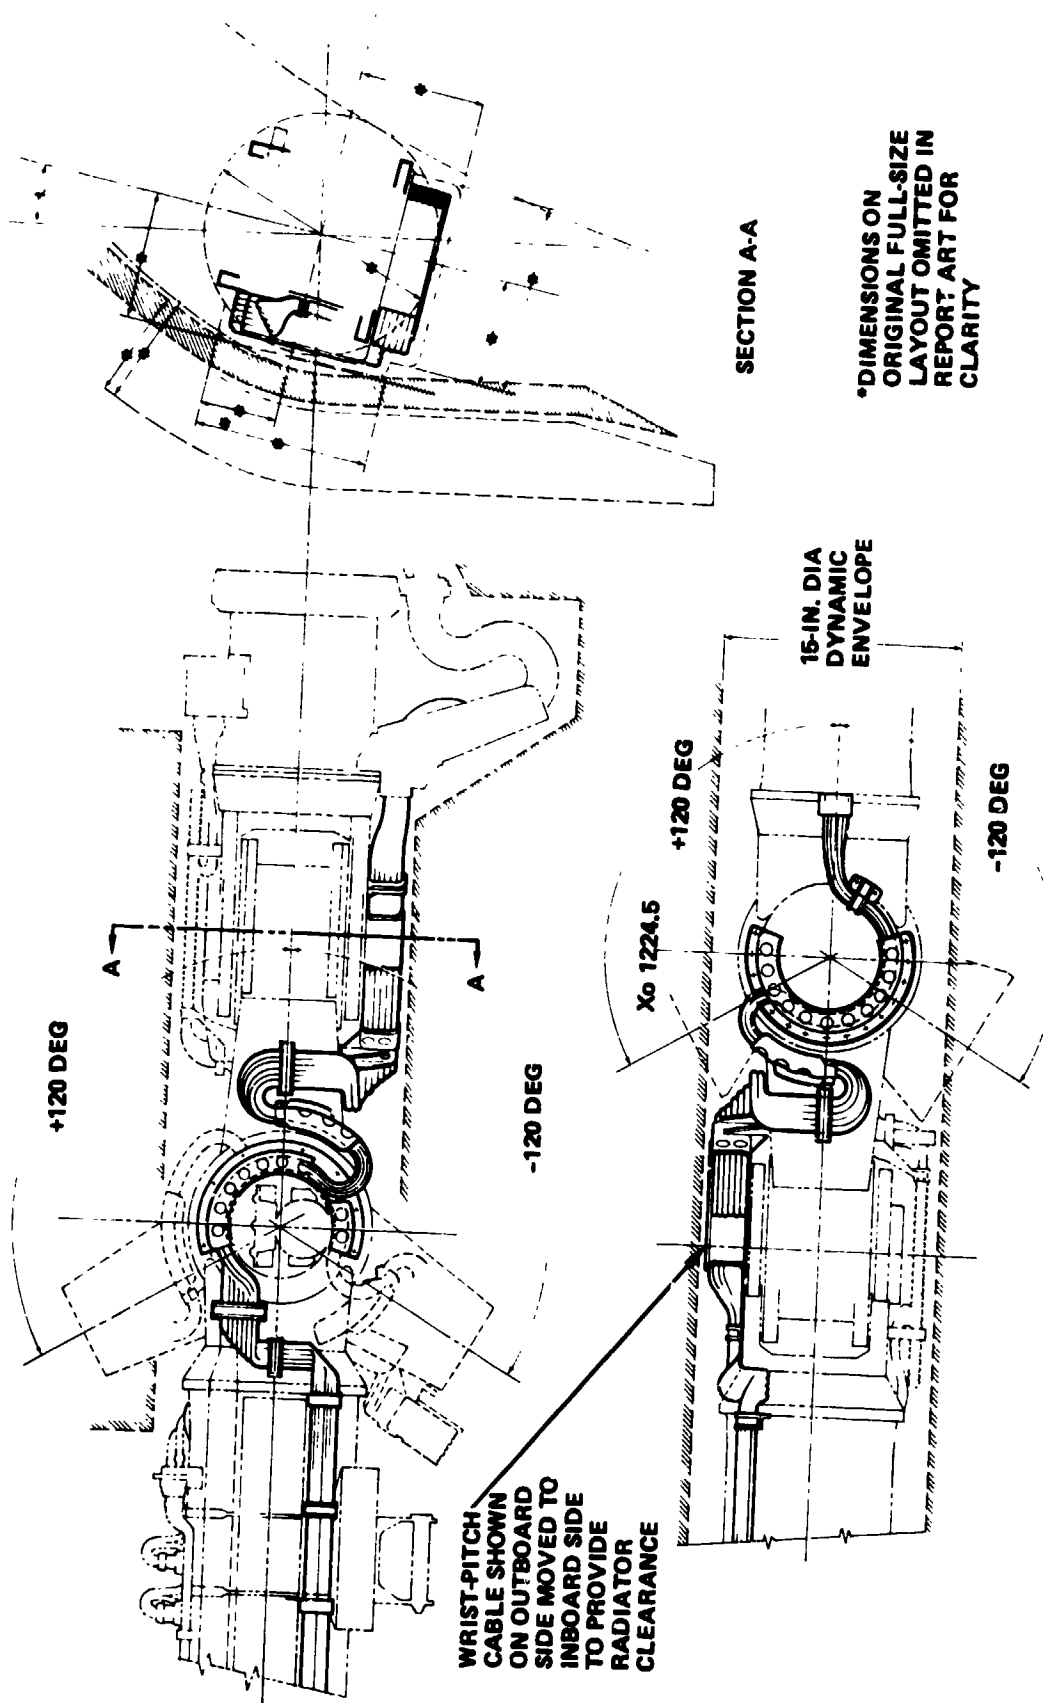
Cable Handling System -- Wrist Pitch/Yaw Joint
